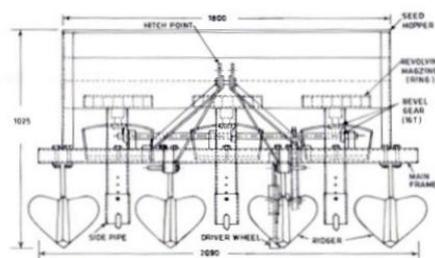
Front view of semi-automatic potato planter (all dimensions in mm)
